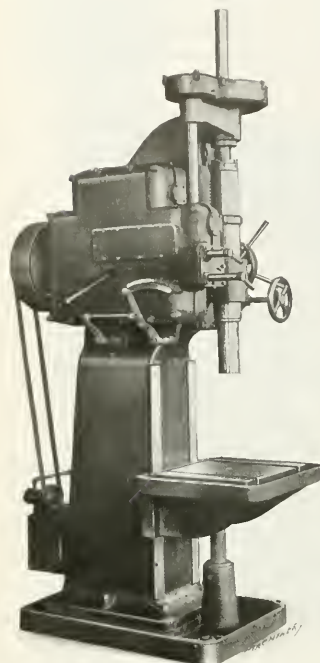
Pawling & Harnischfeger Heavy-duty Upright Drill
